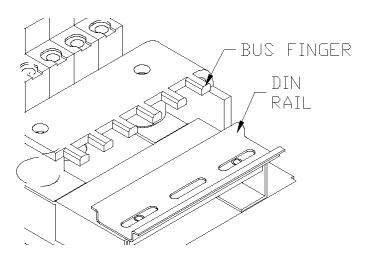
Merlin Gerin 12 CB Module Installation Detail
